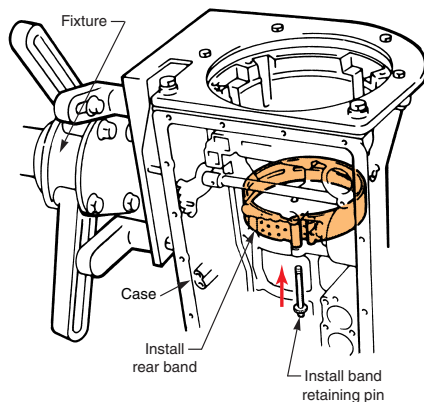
The location of a band in the case on one type of transmission is shown. In most instances, the band should be installed before installing the drum or gearset member on which it will ride. (DaimlerChrysler)
